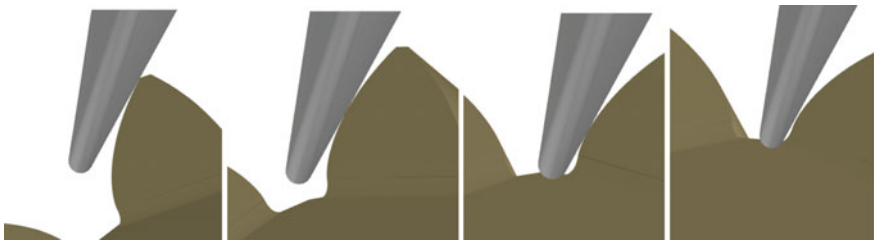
CoSIMT chamfering at Toe: tooth flank and root
